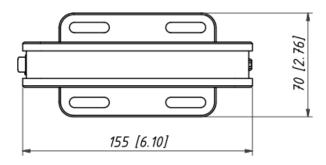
control unit outline drawing, front and top view in mm [inch]
